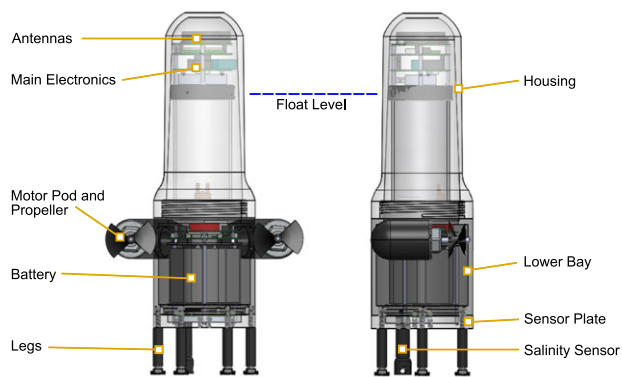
Front and side view of CAD drawing of active drifter; components labeled.
